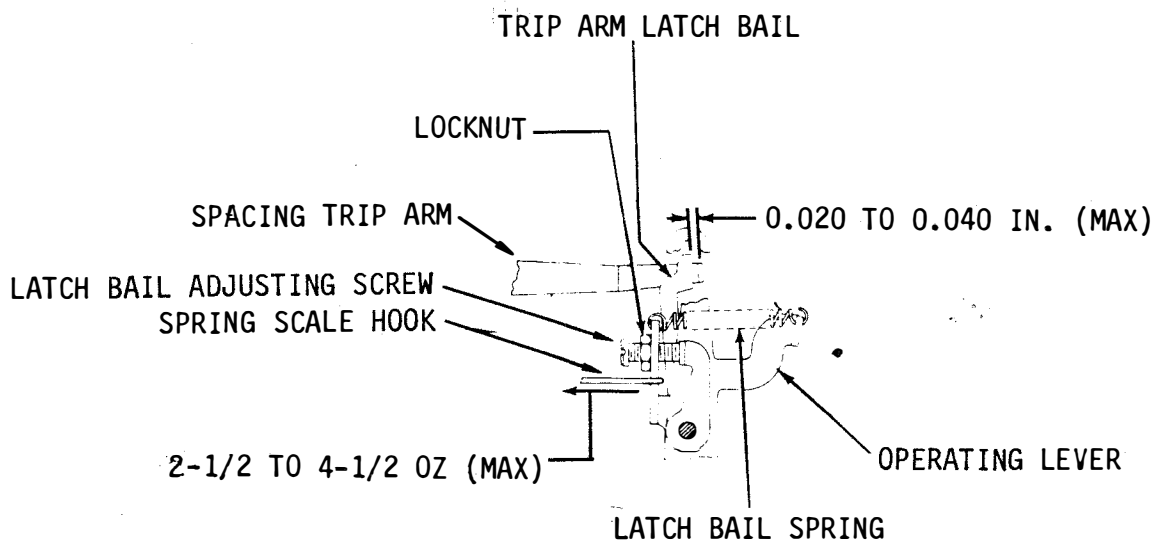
Trip Arm Latch Bail and Trip Arm Latch Bail Spring, Left Side View
